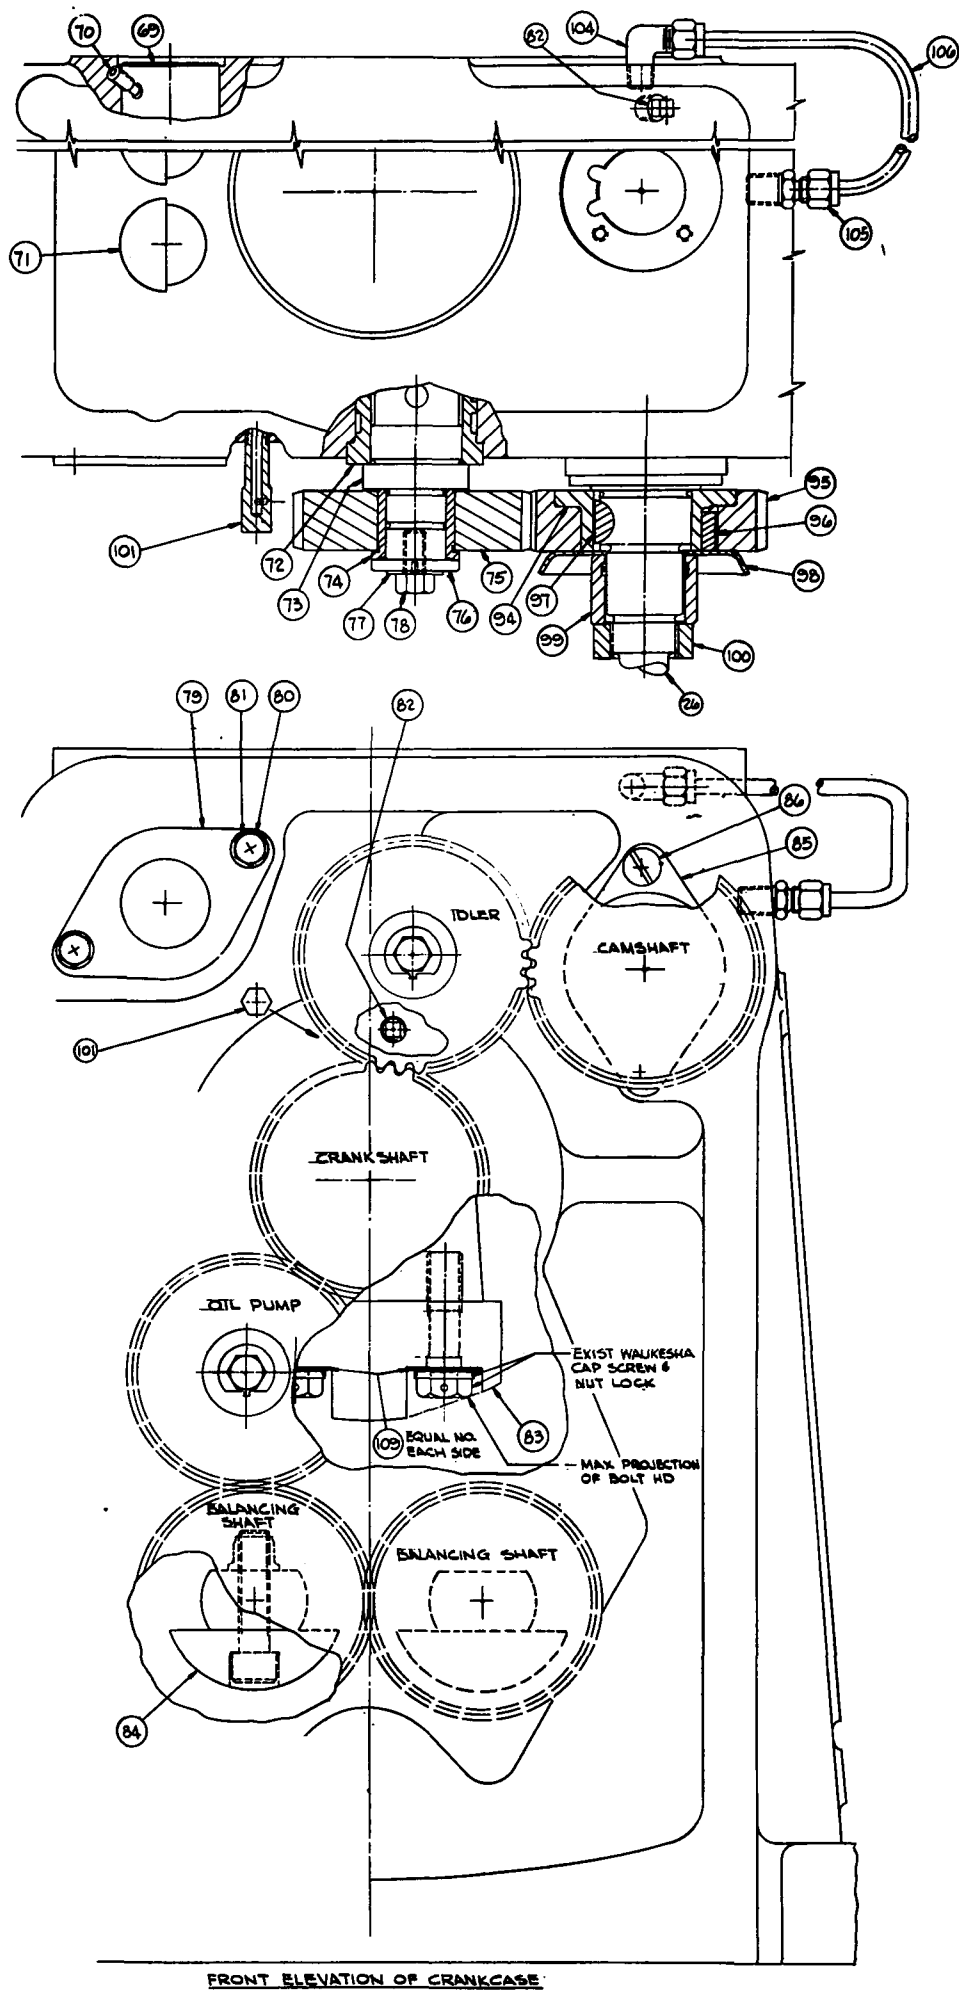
Cam Shaft Drive, Steam Expander Trunk Type Piston (GE Dwg. 707E719, Sh. 2)
